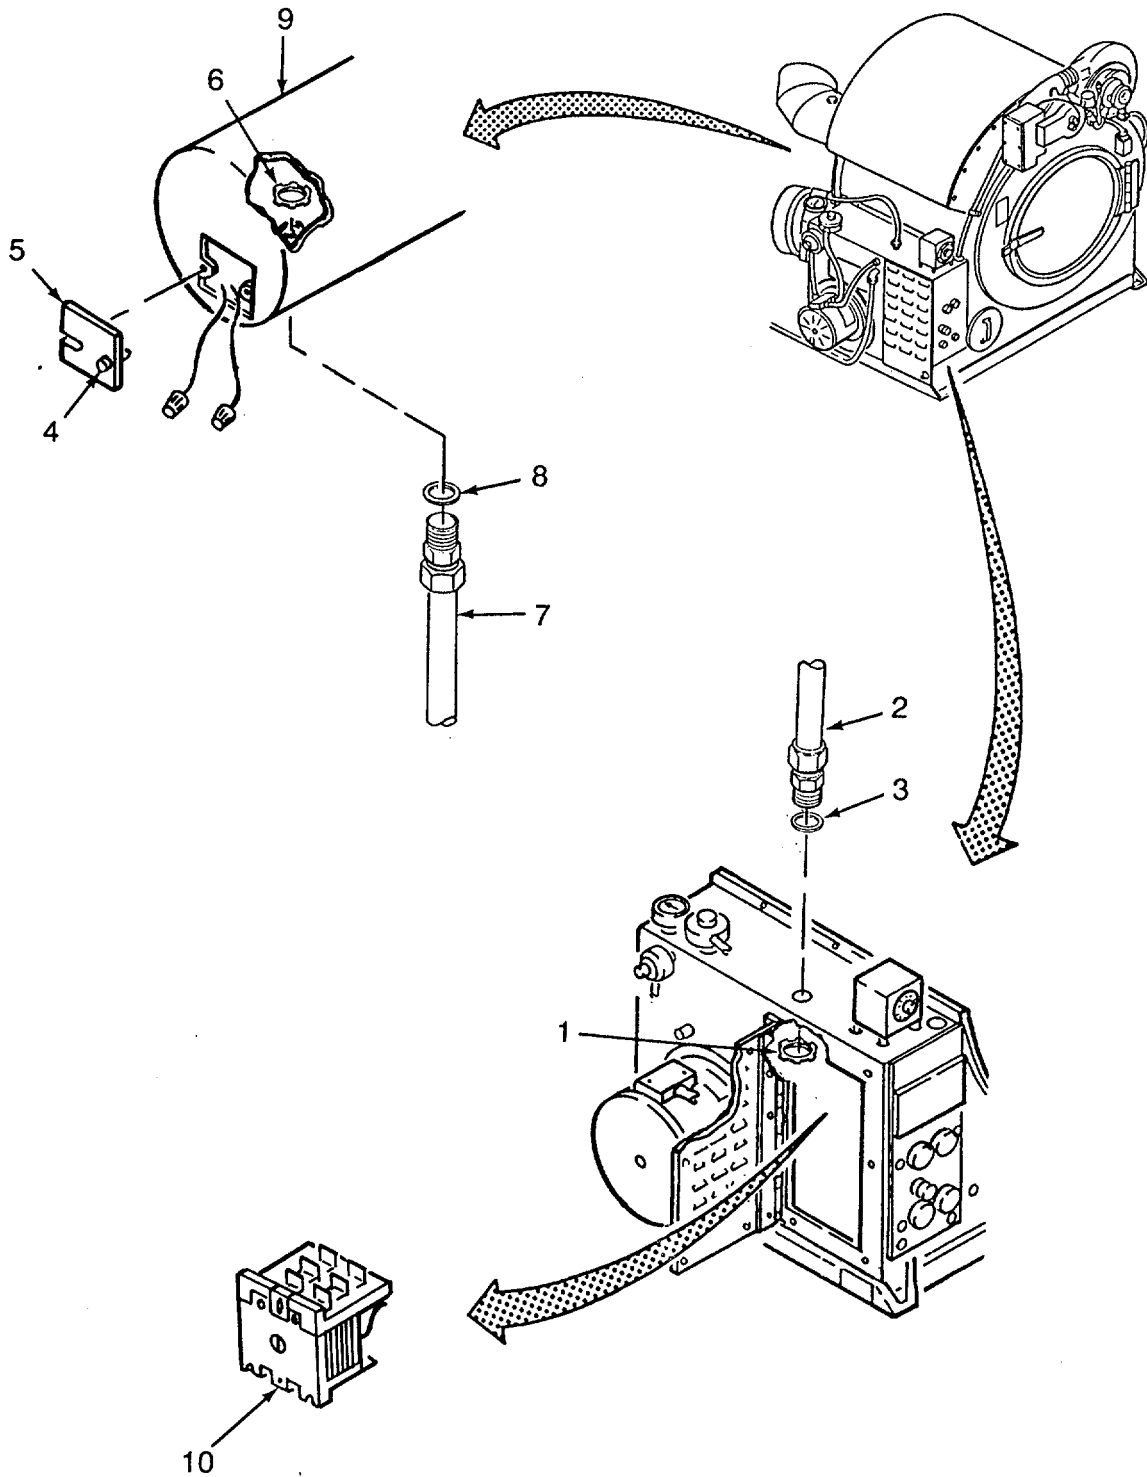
Tumbler Motor - Base Control Box Conduit
